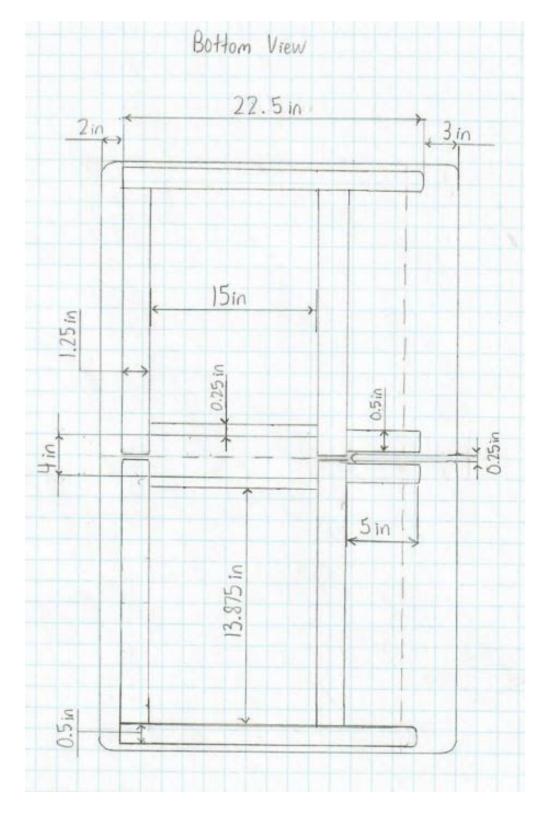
The sketch and dimensions of the bottom view of the ramp.
